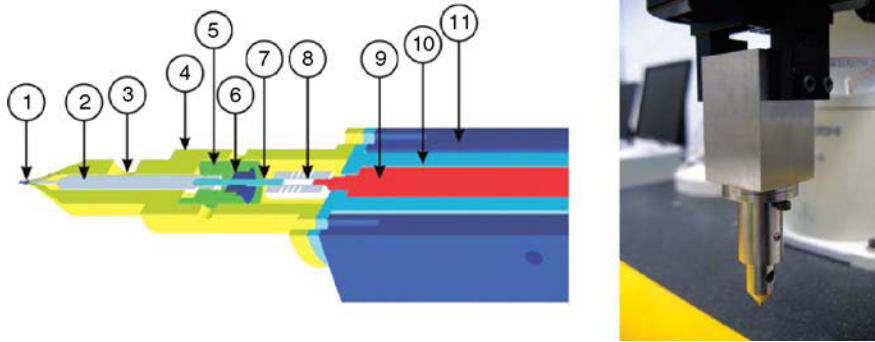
Detailed screwdriver design. 1 – micro-screw, 2 – shaft, 3 – vacuum connection place, 4 – corpus, 5 – holder, 6 – bearings, 7 – shaft, 8 – shaft coupling, 9 – motor and gears, 10 – motor holder and 11 – corpus.
